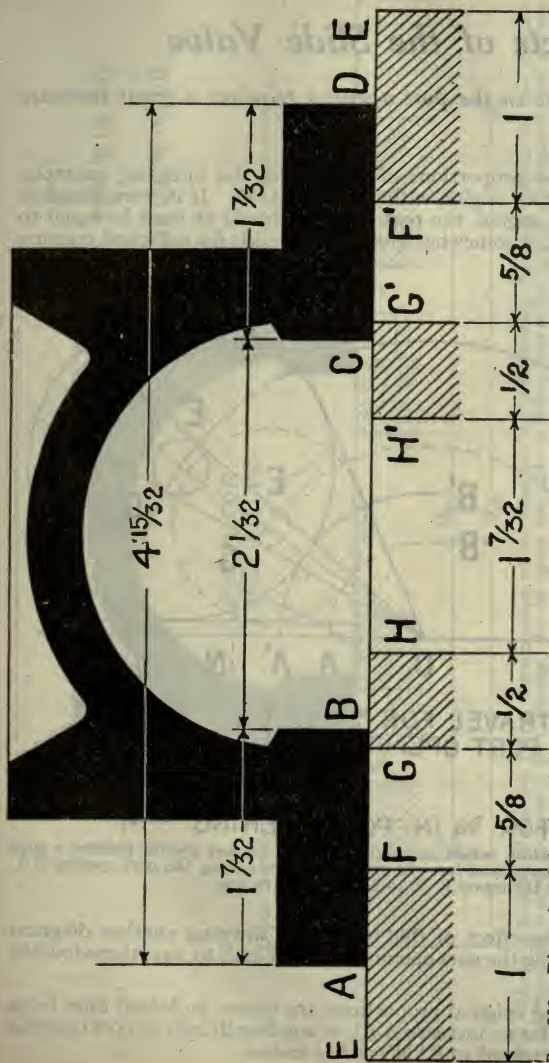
Dimensioned drawing of slide valve from measurements obtained in figs. 389 to 391. In the drawing all the longitudinal dimensions necessary for proportioning the steam features are given. The thickness of valve walls will depend on the type of engine, steam pressure, etc.
